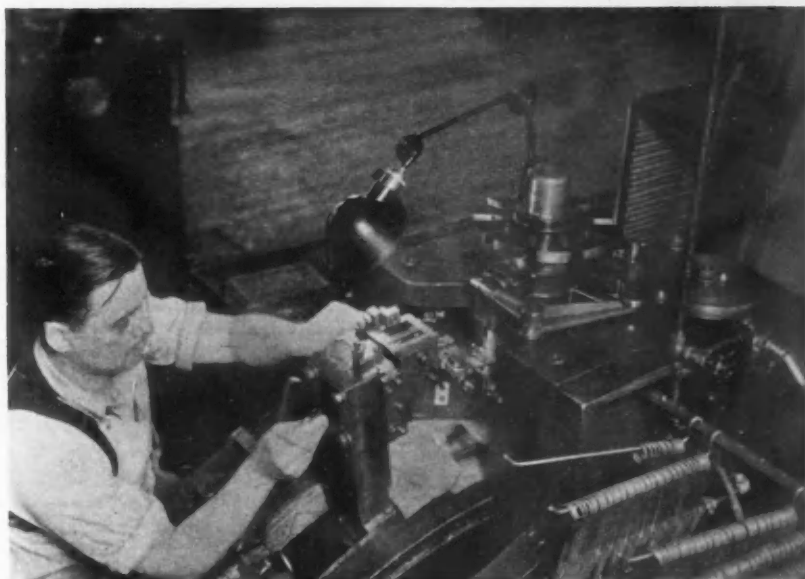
A specially designed turret machine weighing more than 2500 lb. is used for cutting the tiny rail grooves
